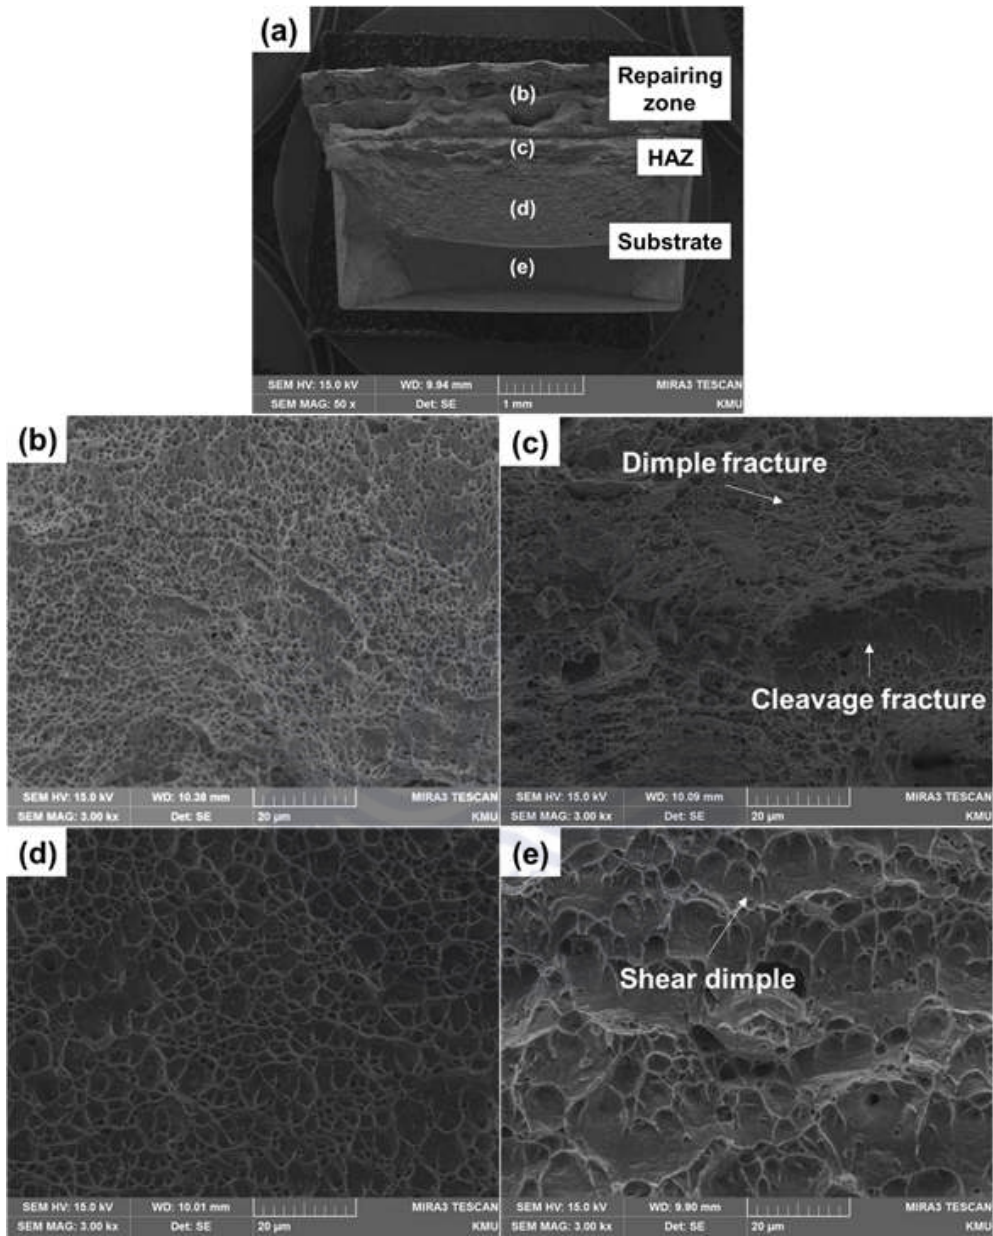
Fracture surface of tensile specimen with excess deposition: (a) low magnification of fracture surface and (b), (c), (d), (e) high magnification of fracture surface at different positions
